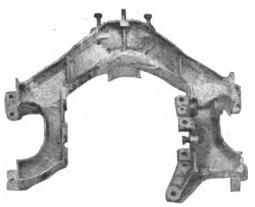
Aluminum Casting Welded by Gas Torch Courtesy of Davis-Bournonville Company
